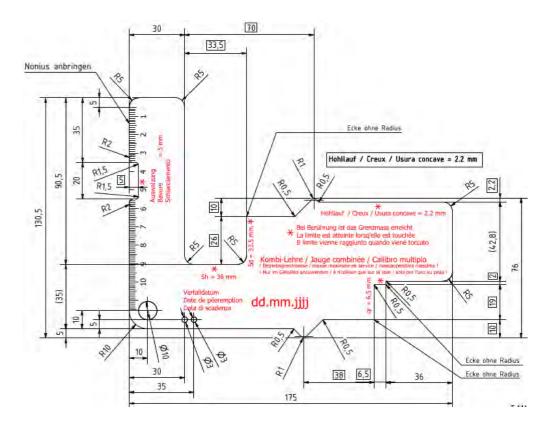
Dimensions of combined gauge for verifying qR, Sd, Sh, including projections and false flanges
